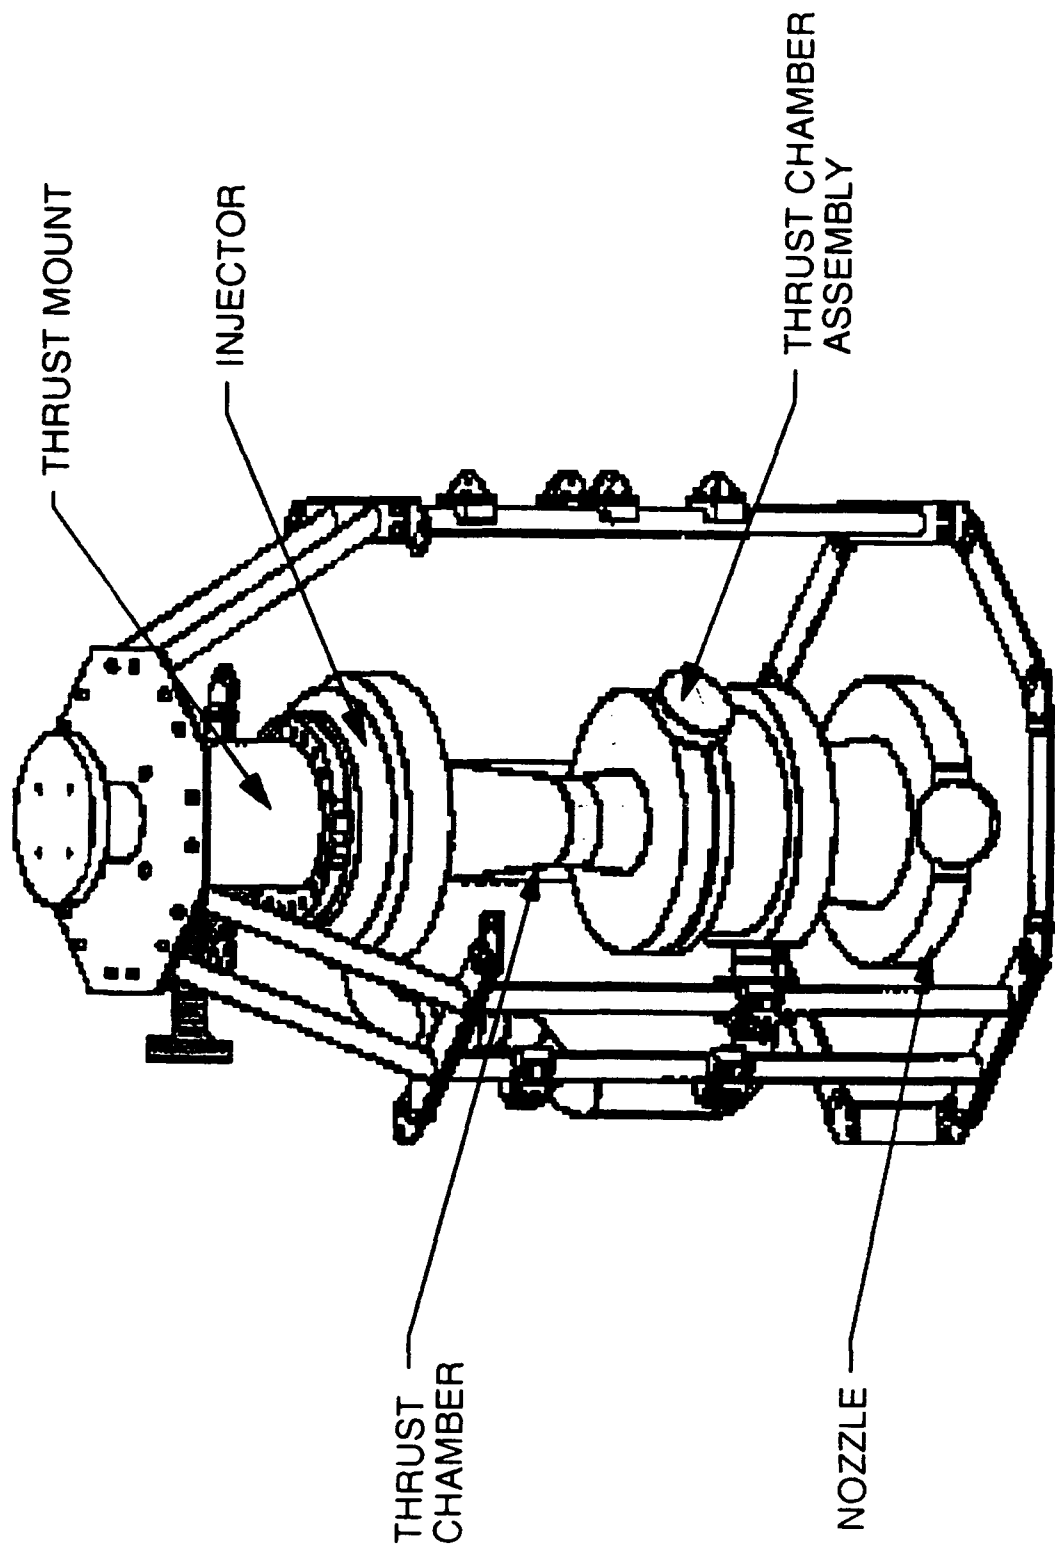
Thrust Chamber Assembly Installed in Partially Assembled Frame
